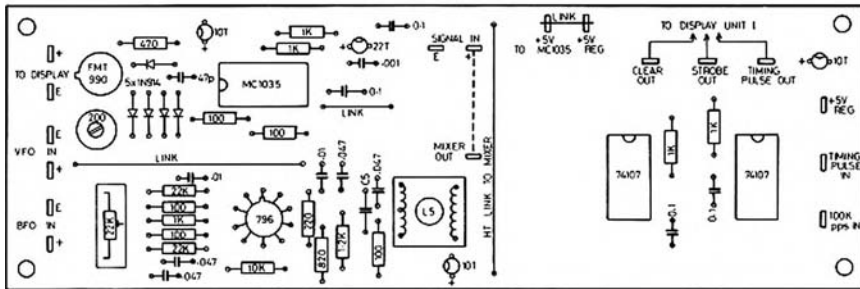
UNIT J - COMPONENT LAYOUT
